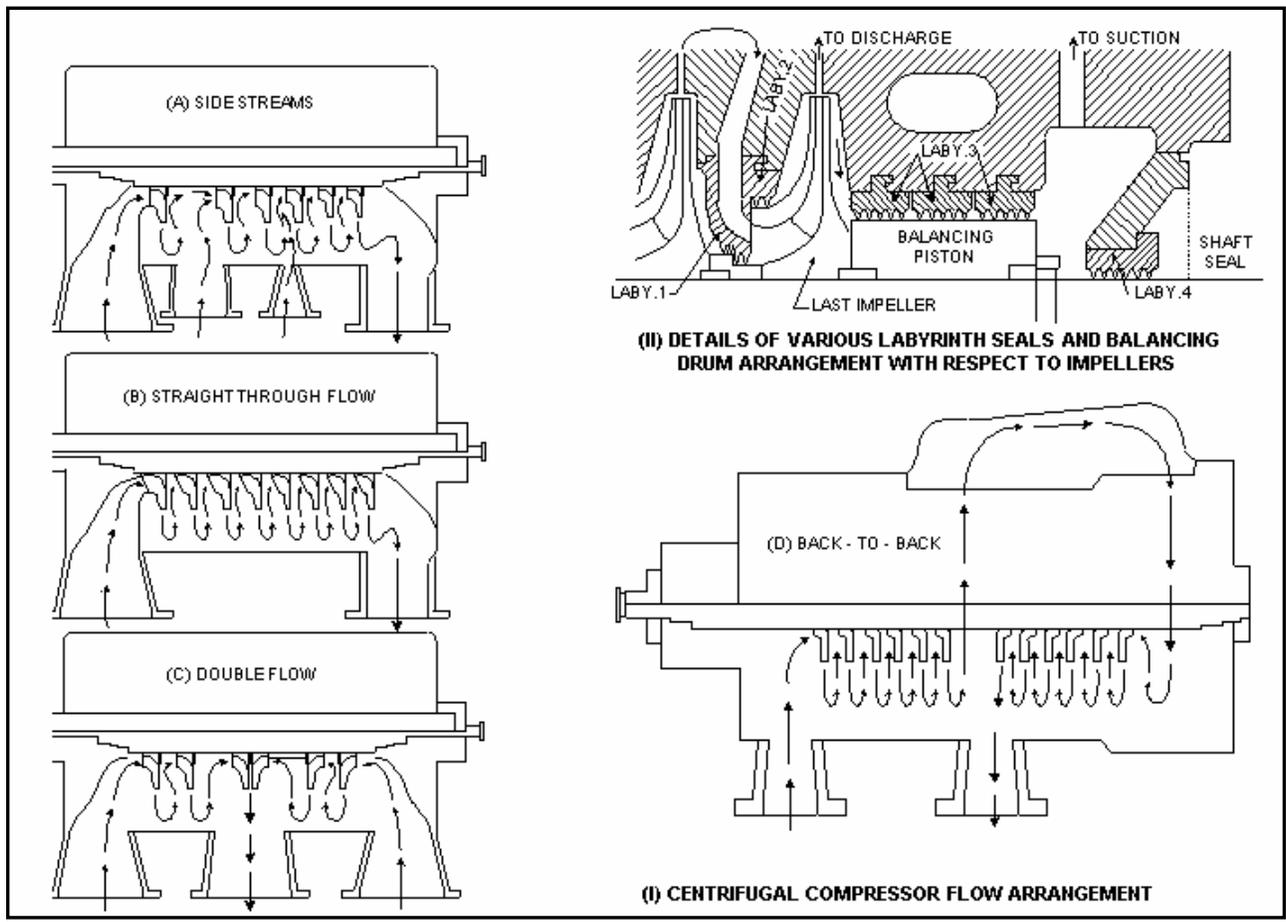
Typical compressor flow options (A through D) and details of labyrinth seals and balancing drum arrangement relative to impellers.
